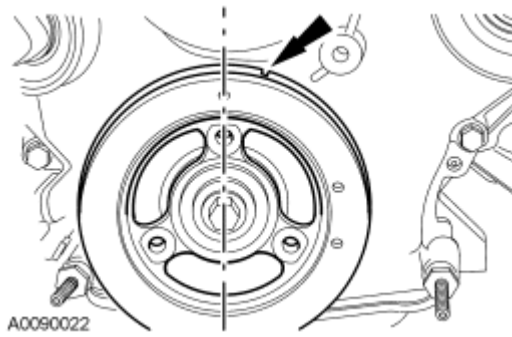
Locating Crankshaft Damper Spoke Timing Mark
